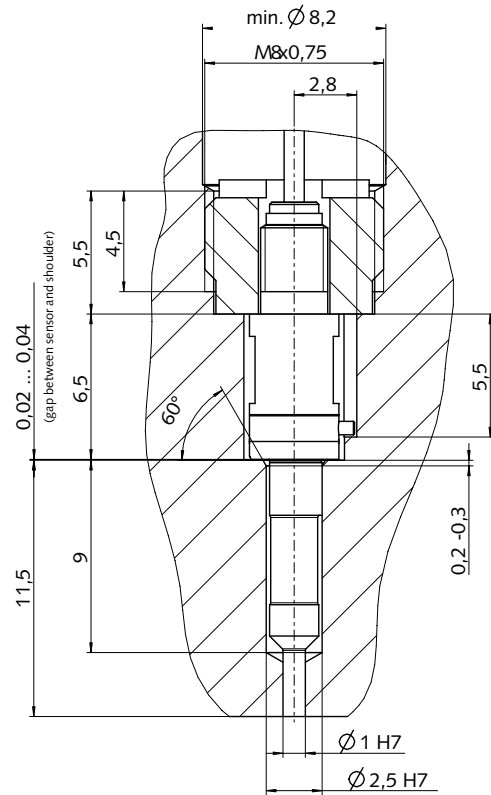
Optional installation with mounting nut Type 6460A1 and key way pin Type 65001430
